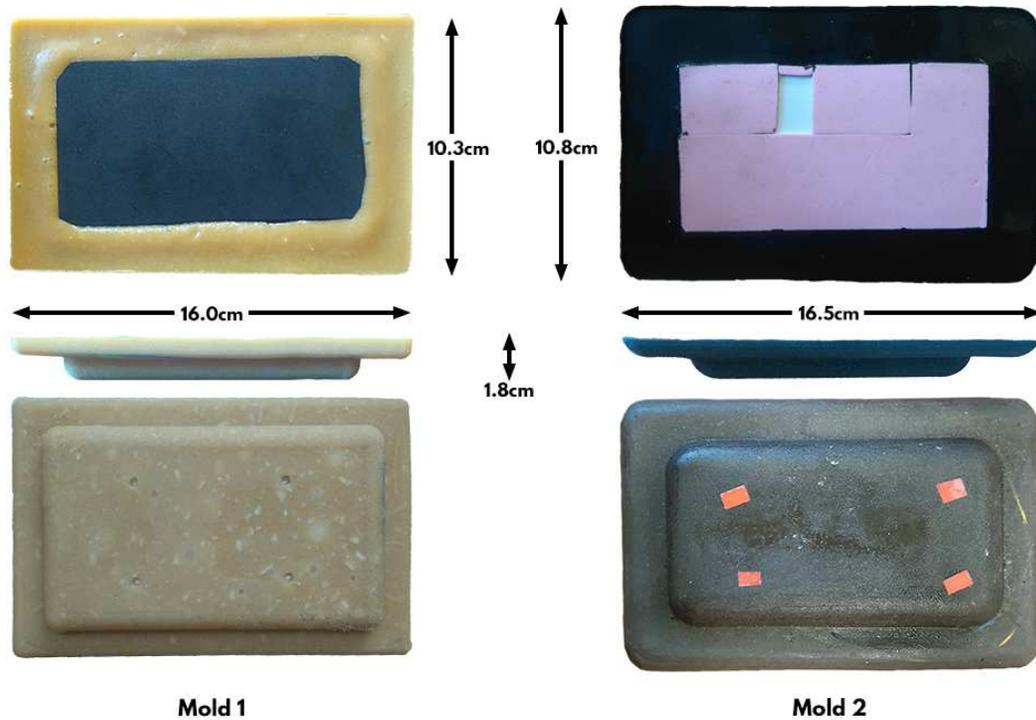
Differences between the first mold (Mold 1) and the second mold (Mold 2)
